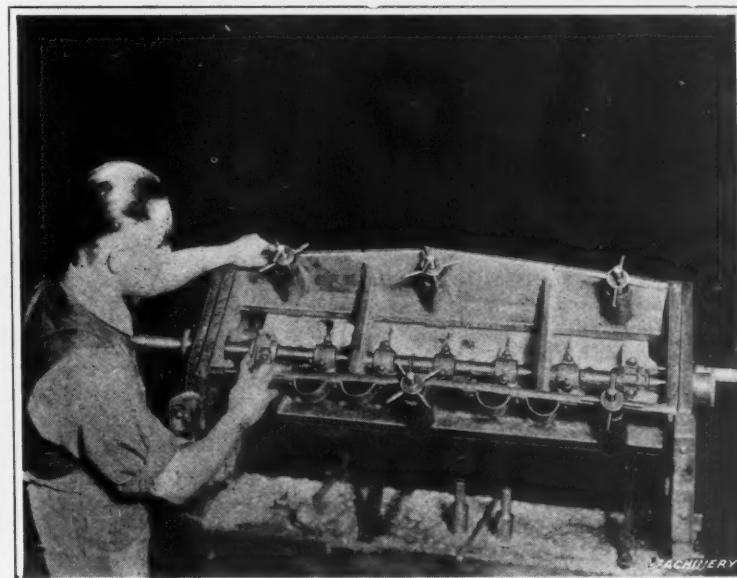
Special Boring Machine used for finishing Main-line Bearings in Engine Base
